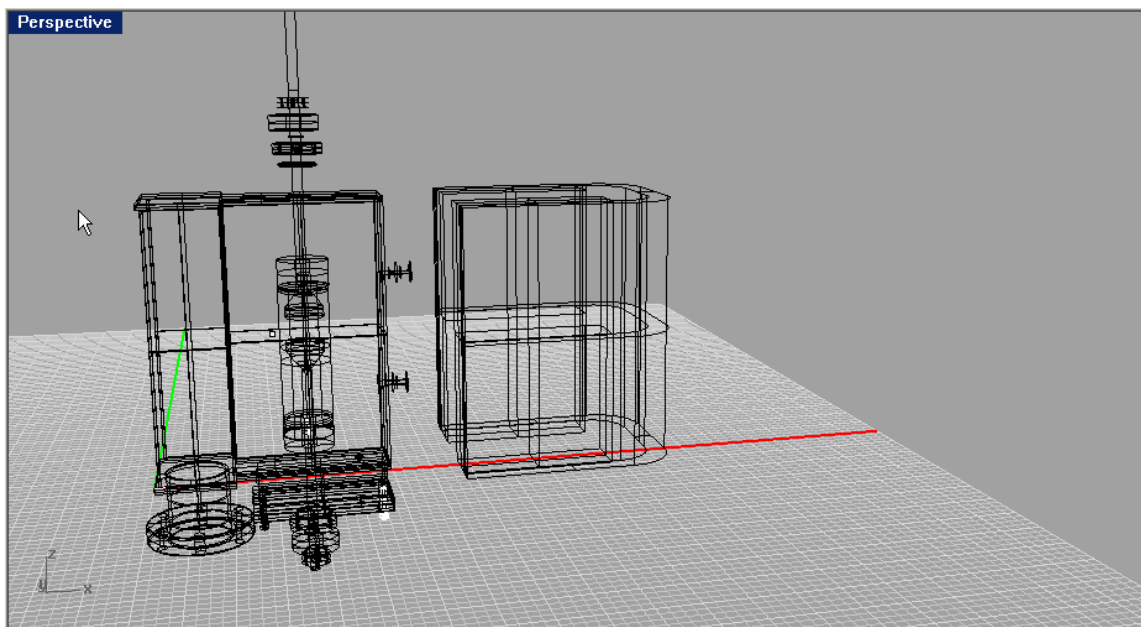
Prototype switch w/ vacuum ion pump pod and magnetic plates.
